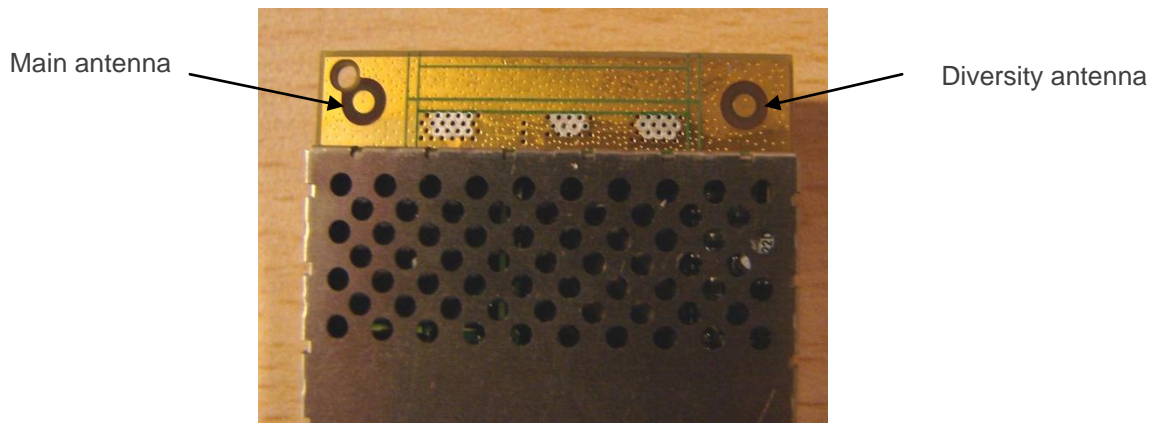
Assembly process - Coaxial cable connection location for Q26EX
